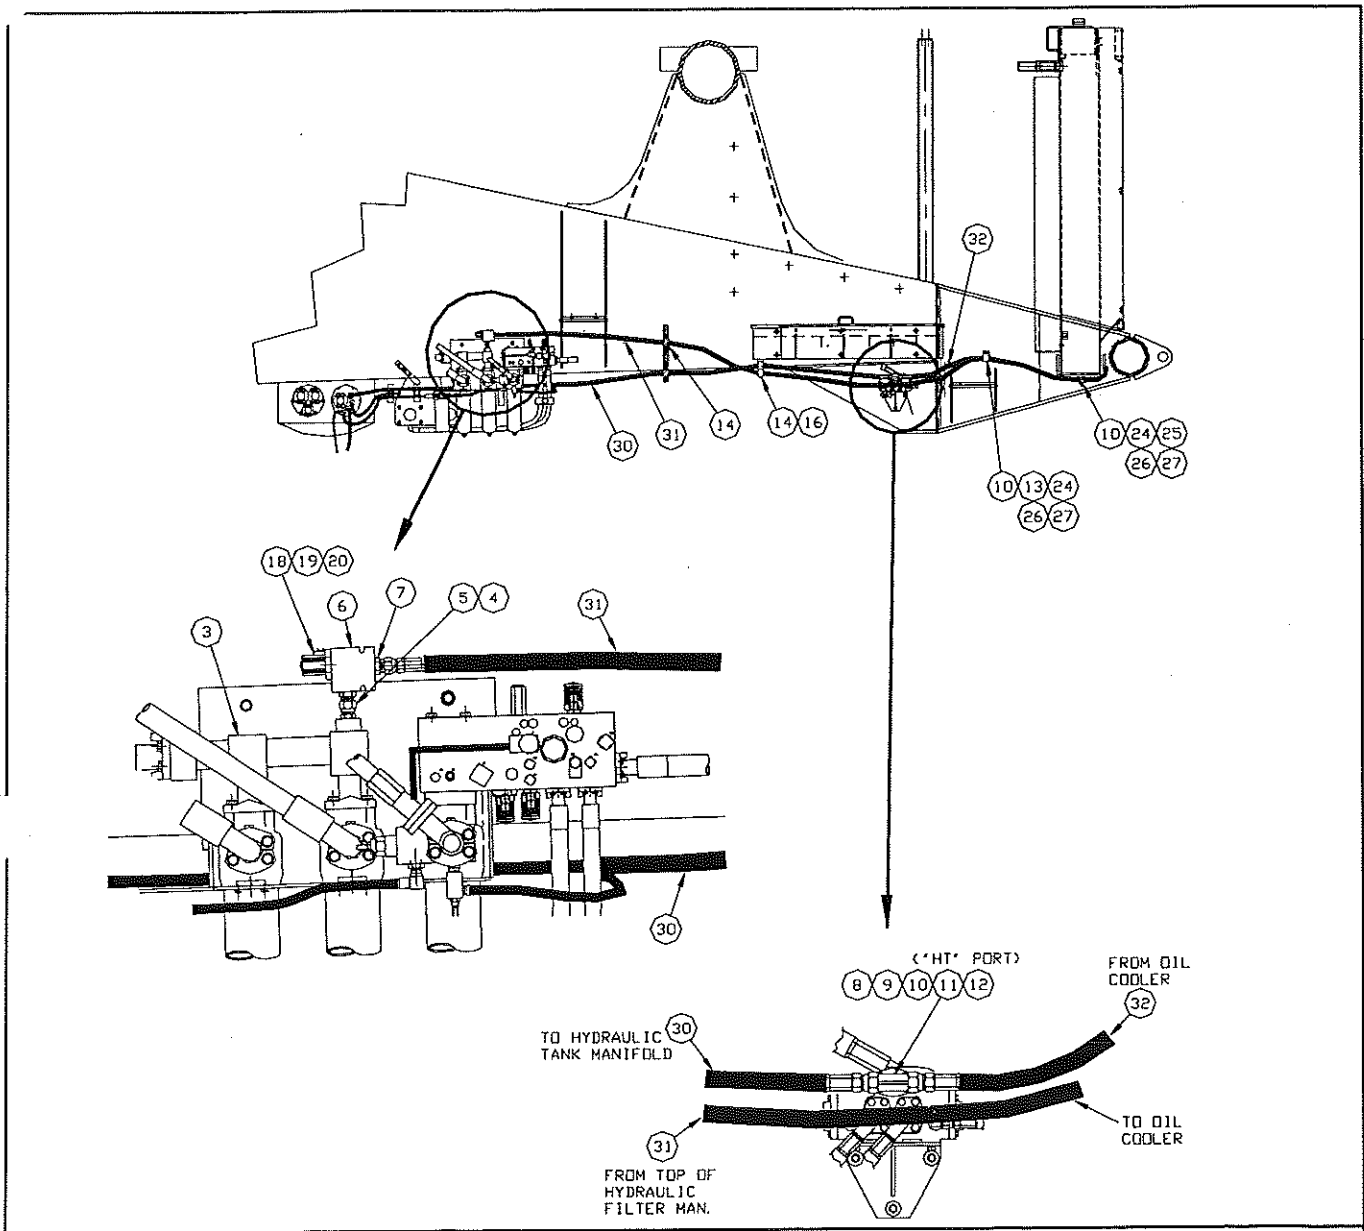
DUMP SYSTEM ASSEMBLY (A85183 SHEET 5 OF 6)
